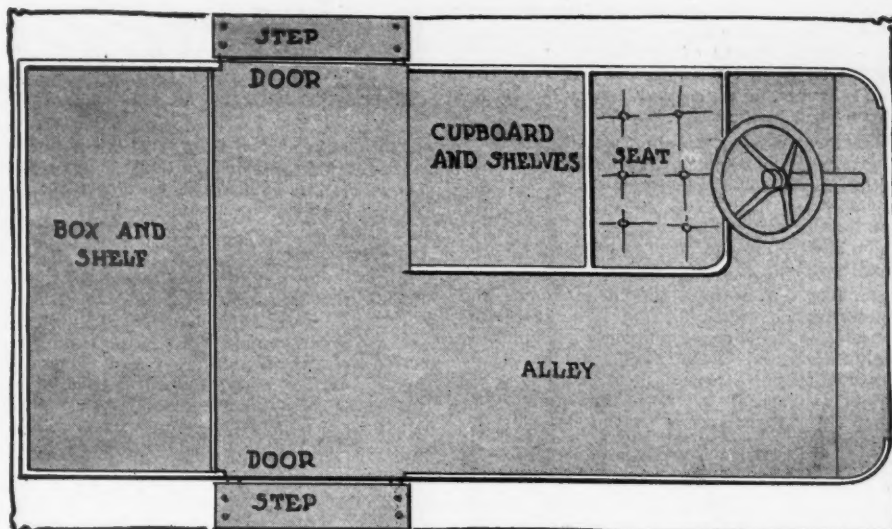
Top view of Piper Bread Co. truck body showing alley from driver's seat, and location of cupboards and shelves
